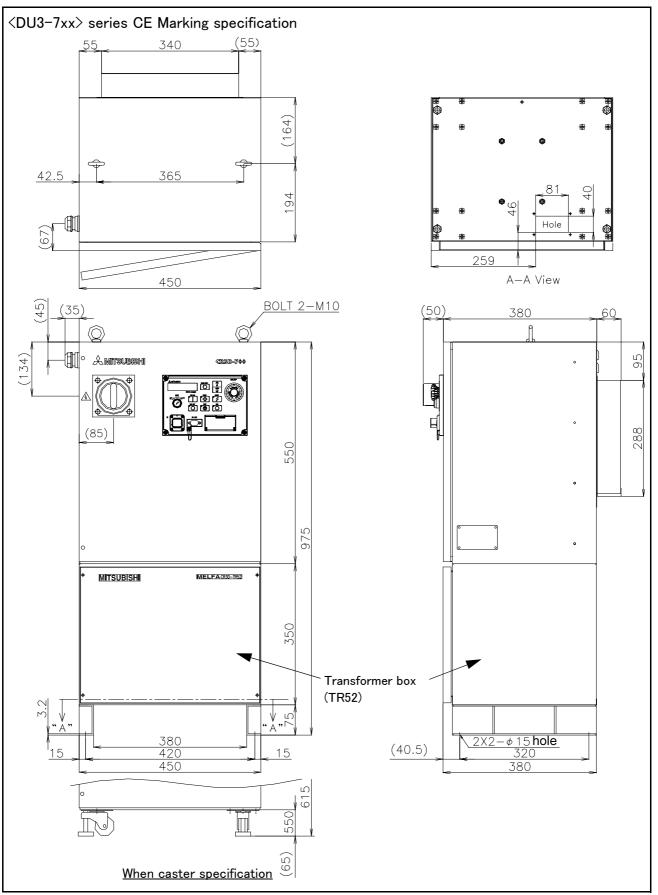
Outside dimensions of controller(DU3-7xx CE Marking)
